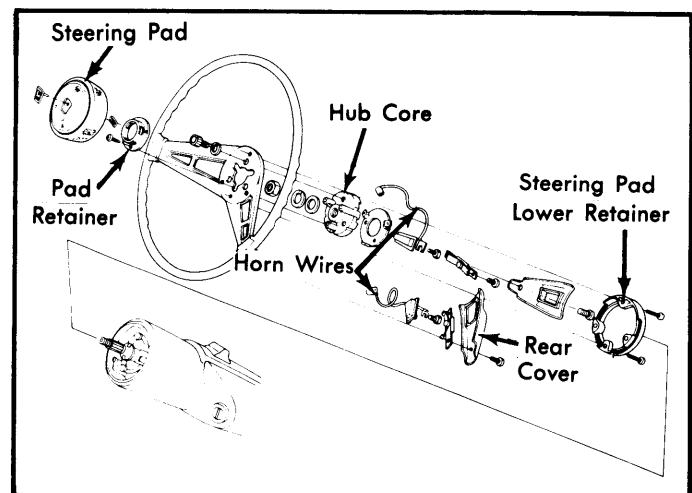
Exploded View of Civic CVCC Steering Wheel and Related Components
